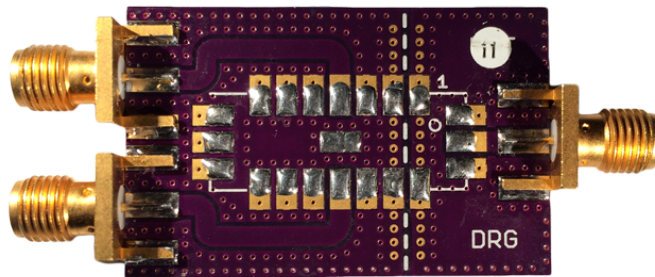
Alternate PCB design on FR4 configured to mate with balun evaluation board with barrel SMA connectors.
